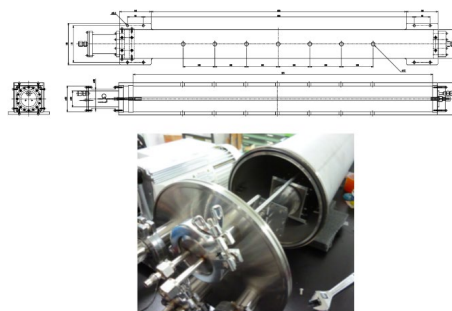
Single straw prototype: (top) prototype drawing; (bottom) general view of the stand
